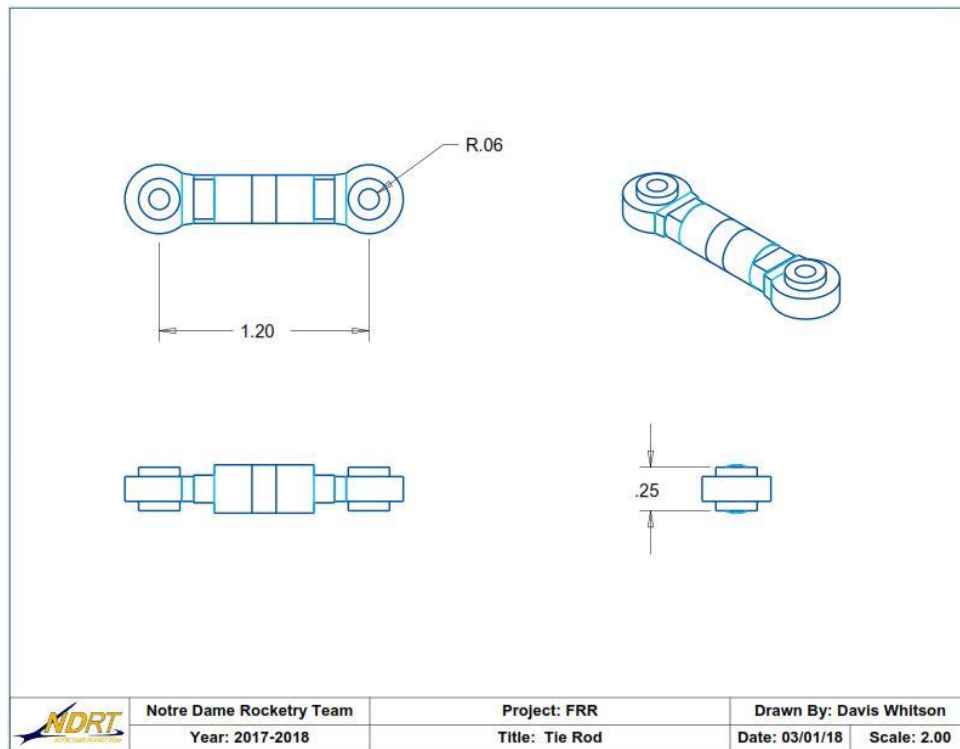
A detailed drawing and picture of one tie rod, though there are four on the real mechanism.
